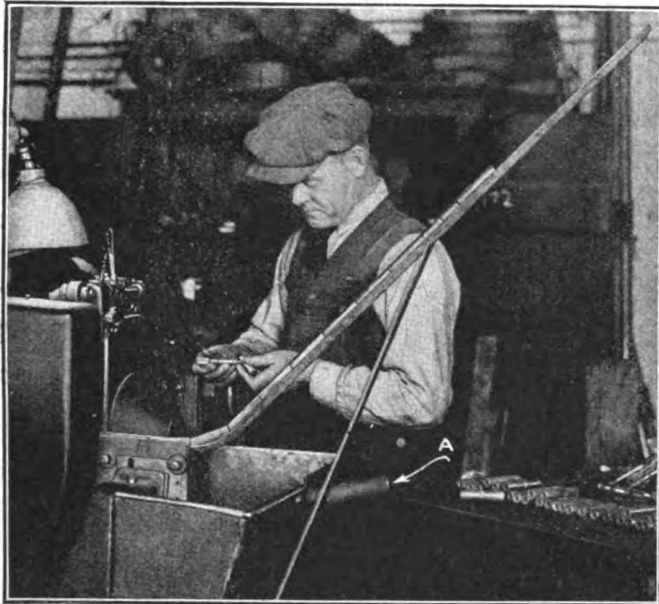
GRAVITY CONVEYOR FOR PISTON PINS
